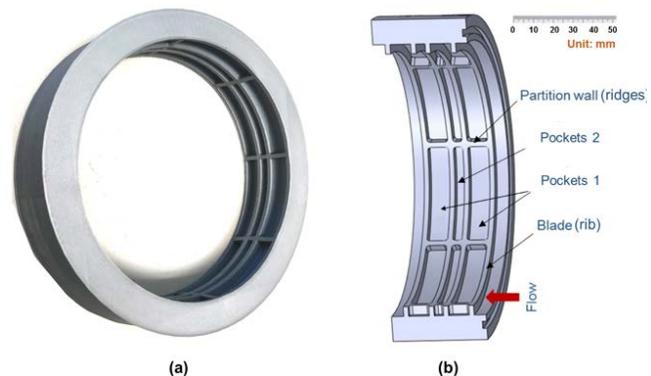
(a) Photograph of test pocket damper seal (PDS), (b) Cut view of fully partitioned PDS.
